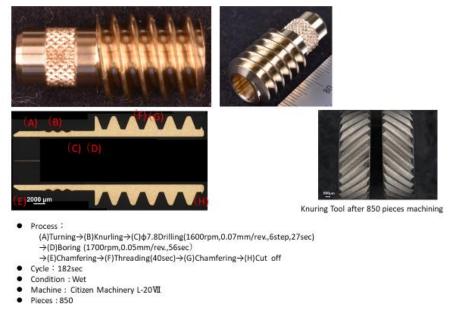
Machining Example 5 - Component Similar to Worm Gear
